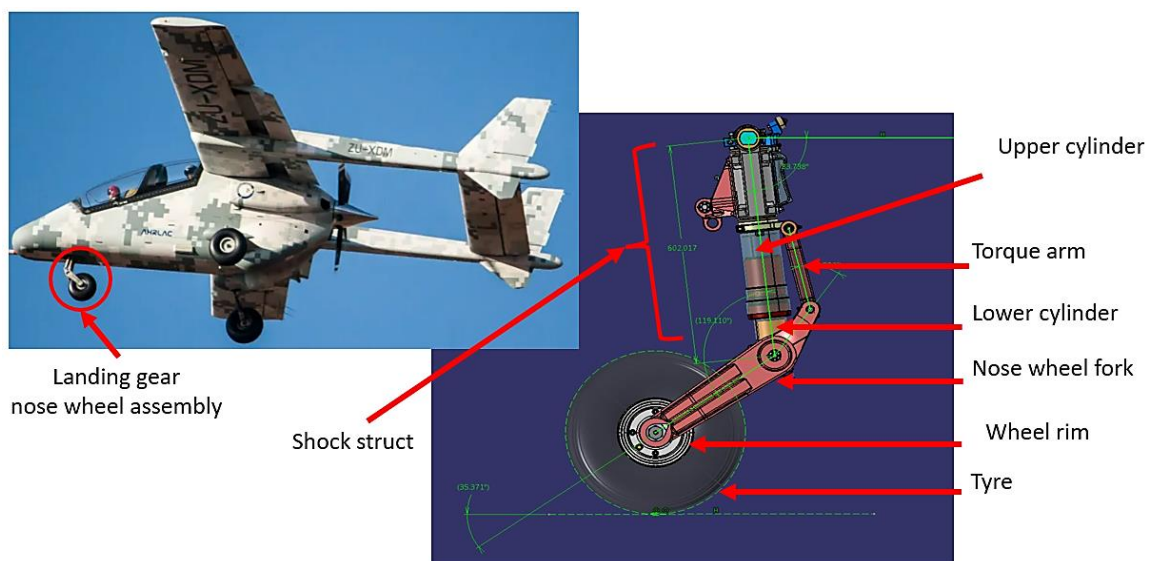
An image of the AHRLAC indicating the landing gear nose wheel assembly and its various components [9]
